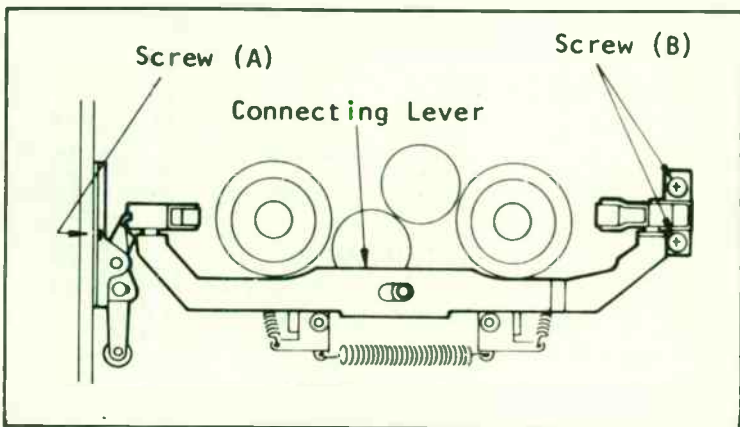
Tension and threading post adjustment (courtesy of Magnavox).
